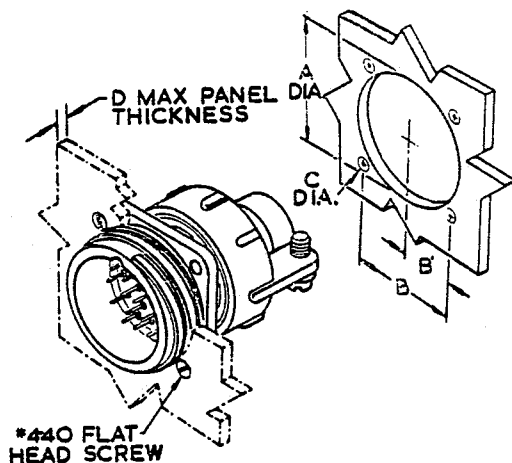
Standard flange receptacle rear mounting (Table 3)
